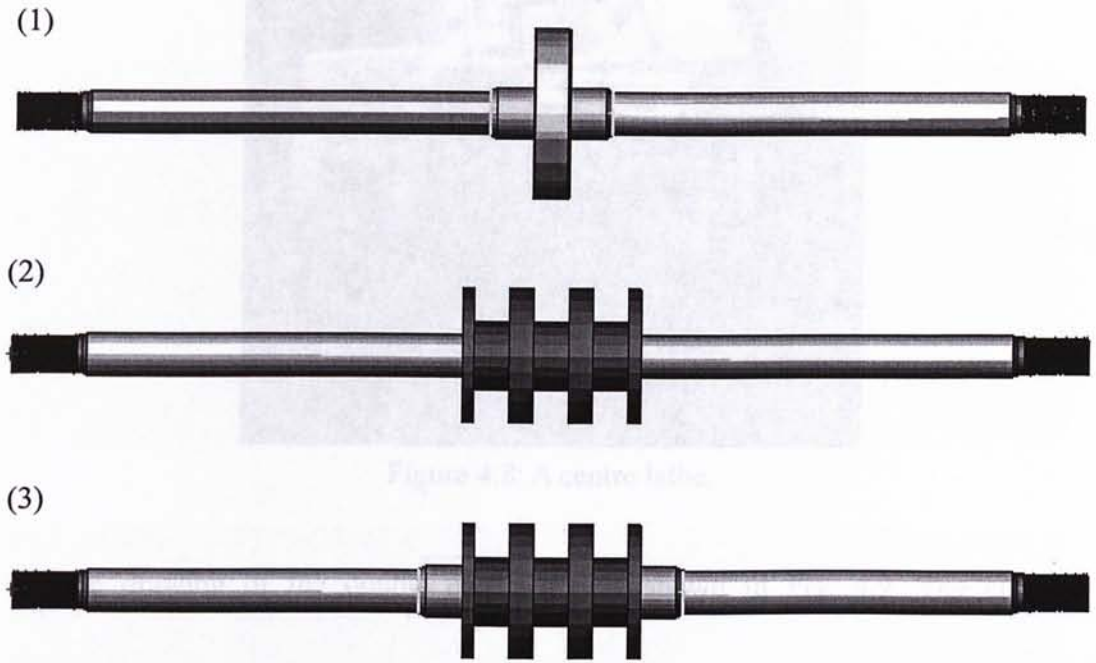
(1) The modified piston rod (2) The low-carbon steel piston head sleeve is assembled (3) The new cushion rings is assembled.
